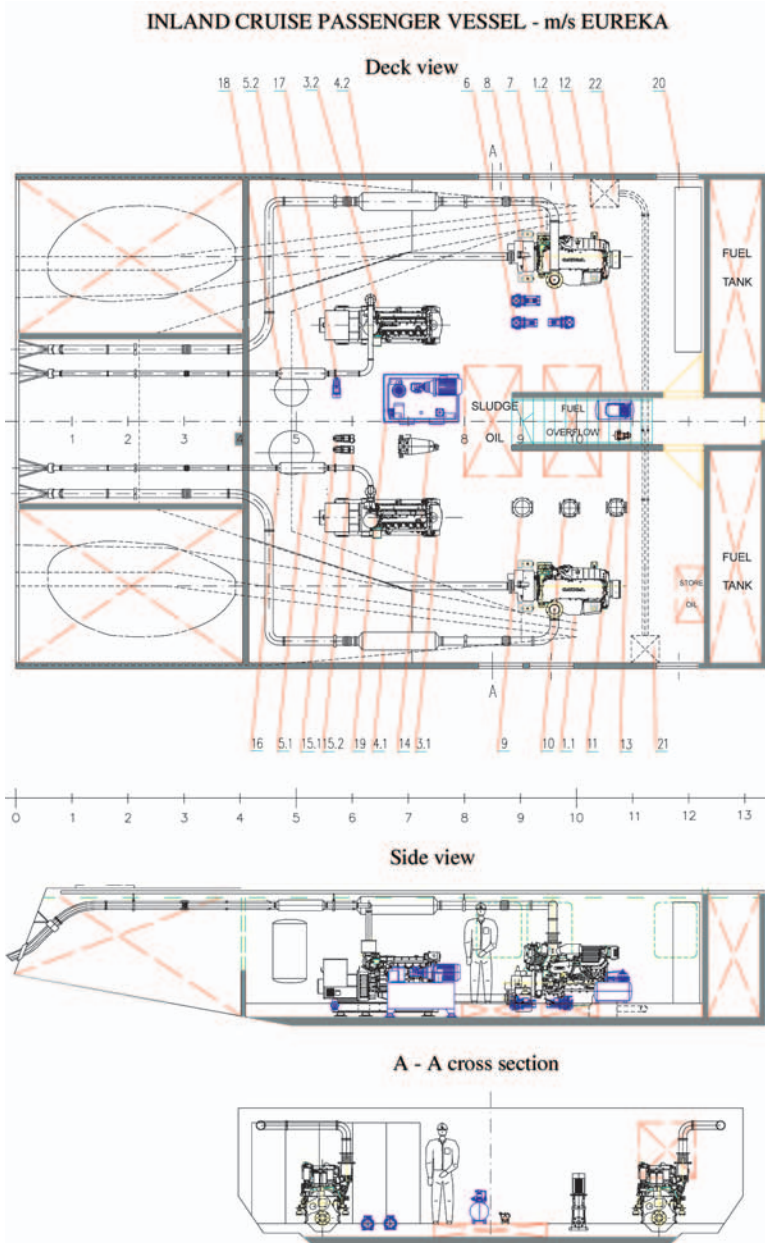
General arrangement plan of the power plant with mechanical (diesel engine) drive of screw propellers.
